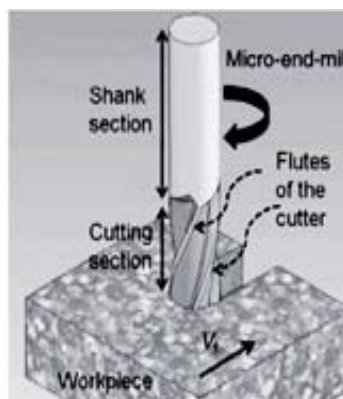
Principle of micromilling process: rotating milling tool consisting of shank and cutting section penetrates the substrate. Tool movement and therefore cutting direction is perpendicular to the tool's rotation axis. [picture: Koç and Özel, 2011]
